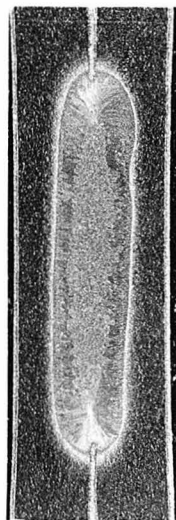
EFFECT OF INCREASED WELDING ENERGY ON WELD NUGGET SIZE.
